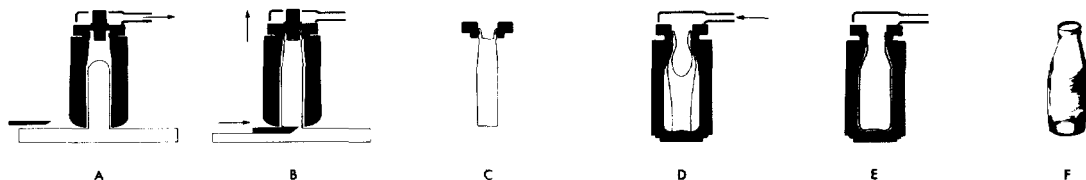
The Owens suction-and-blow process (*Drawing by S. Epps*). A. Gob sucked up into blank mold; B. Neck formed and gob sheared off at base; C. Blank (parison) shape with ring mold still attached; D. Blank shape transferred to full size mold; E. Final shape blown; F. Finished bottle
